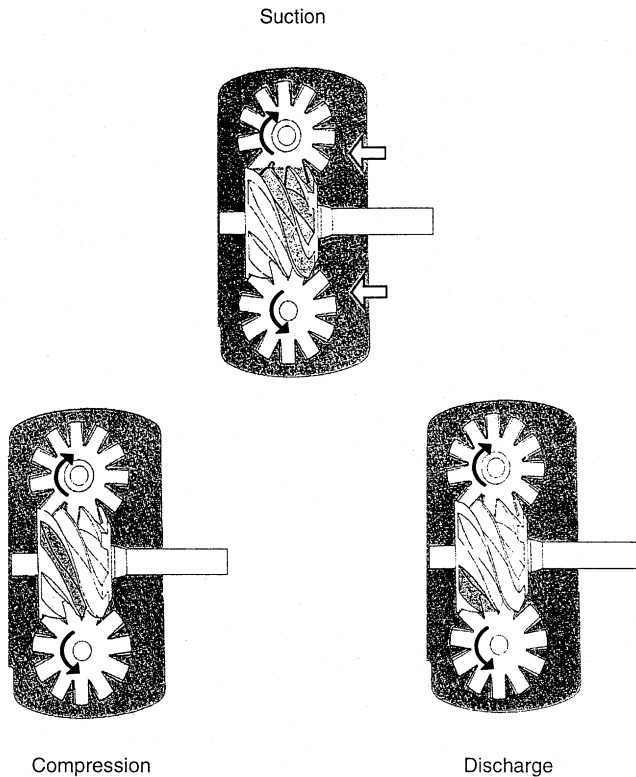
Drawings of a single-screw compressor. (Courtesy of the Copeland Corporation, Sydney, OH.)
